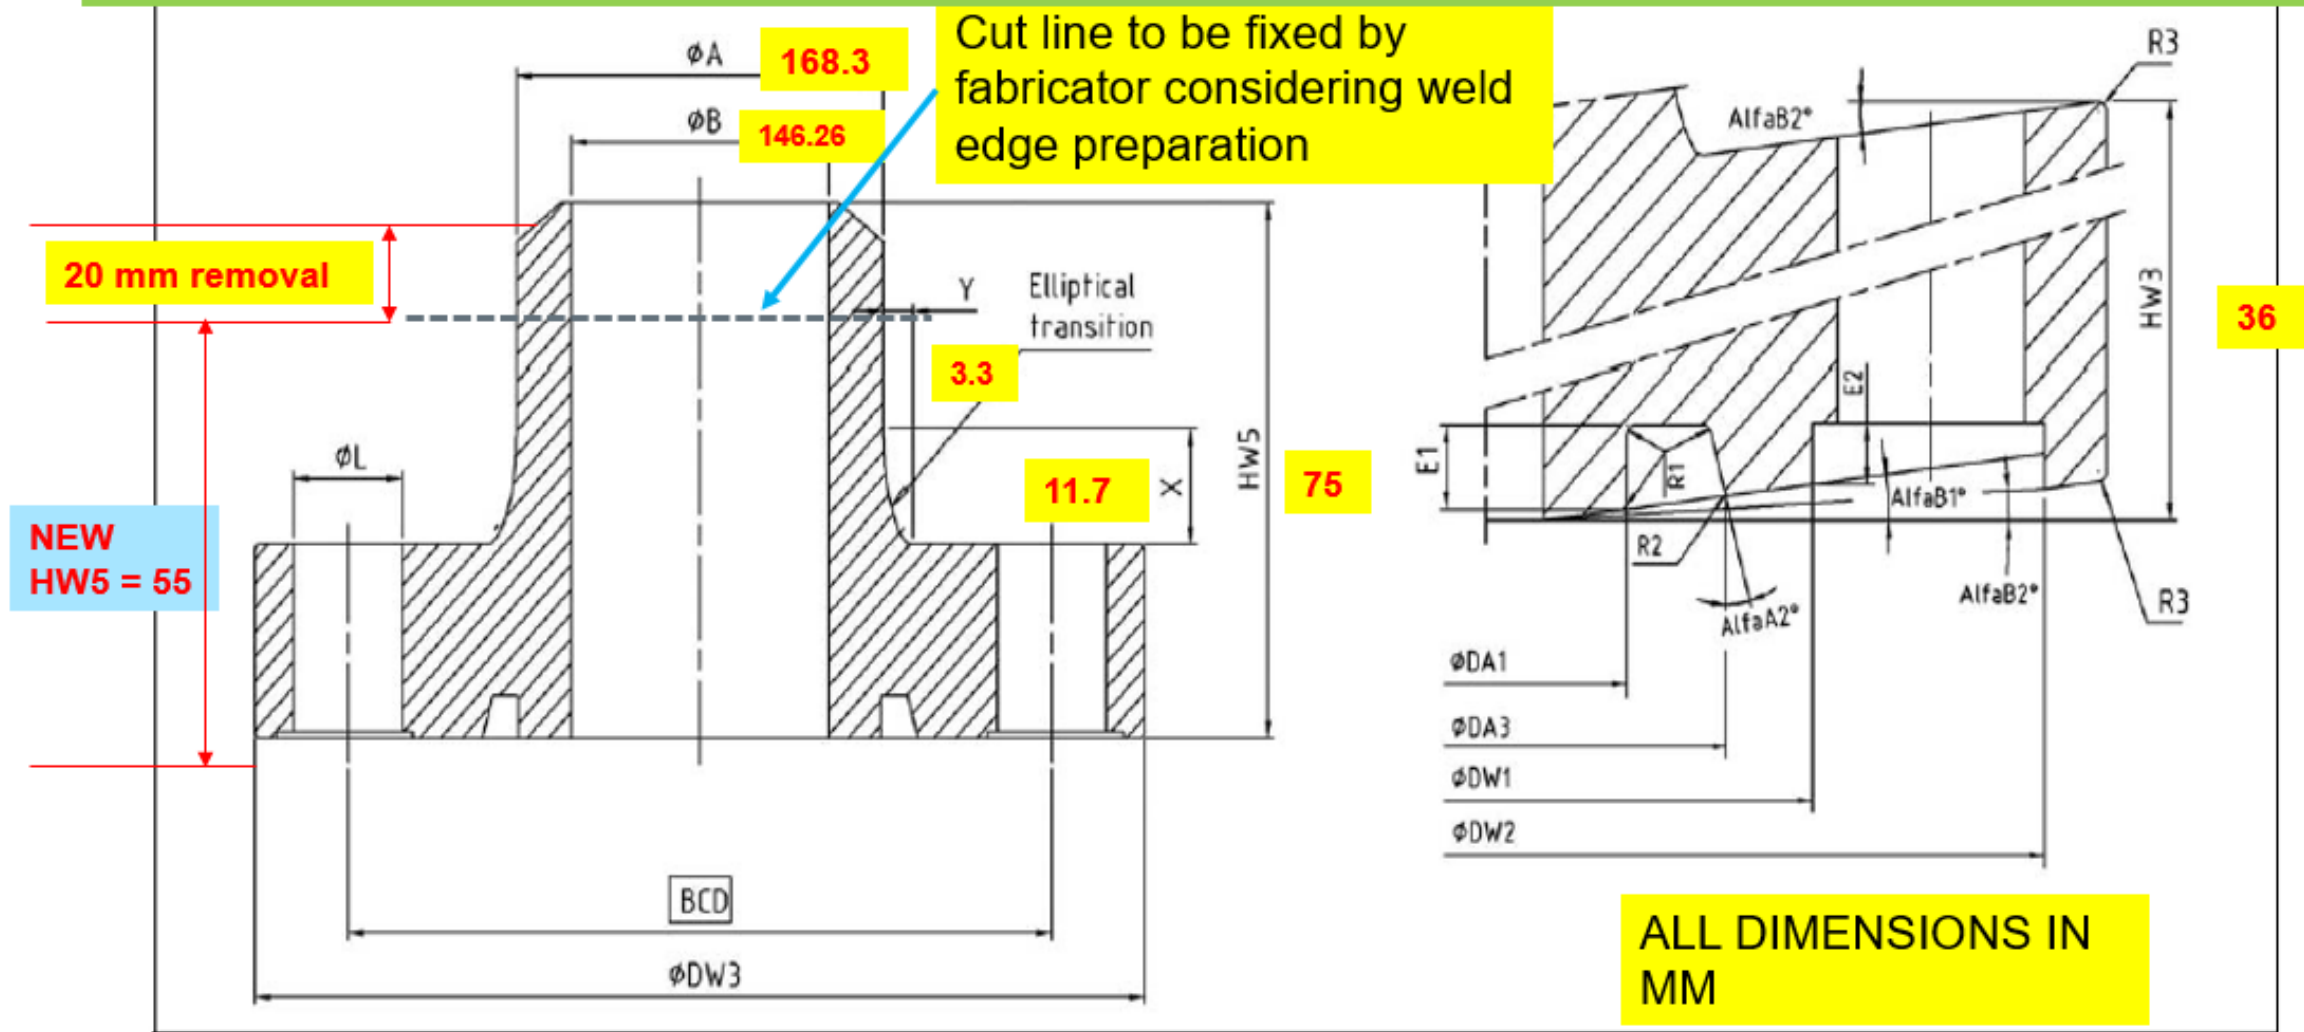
Nomenclatures for weld neck (WN) flanges
